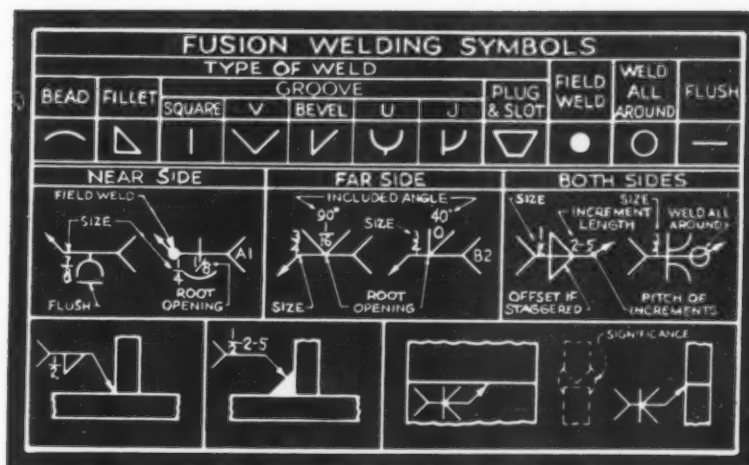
Top—Typical illustration, for fusion welding, of symbols set up in new welding standard. The signs are largely pictorial, as can be seen from the key for bead, fillet welds, etc. Welding specification numbers can be included in the tails of the arrows
